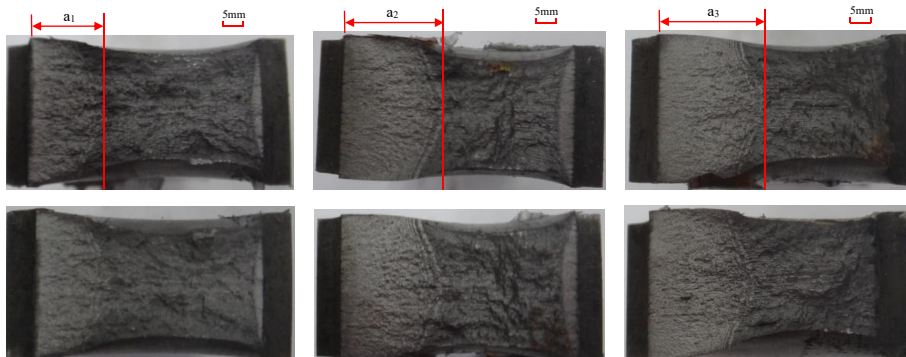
Accumulative plastic damage morphology of the notched plate specimens: No. 1 (left column); No. 2 (middle column); No. 3 (right column).
